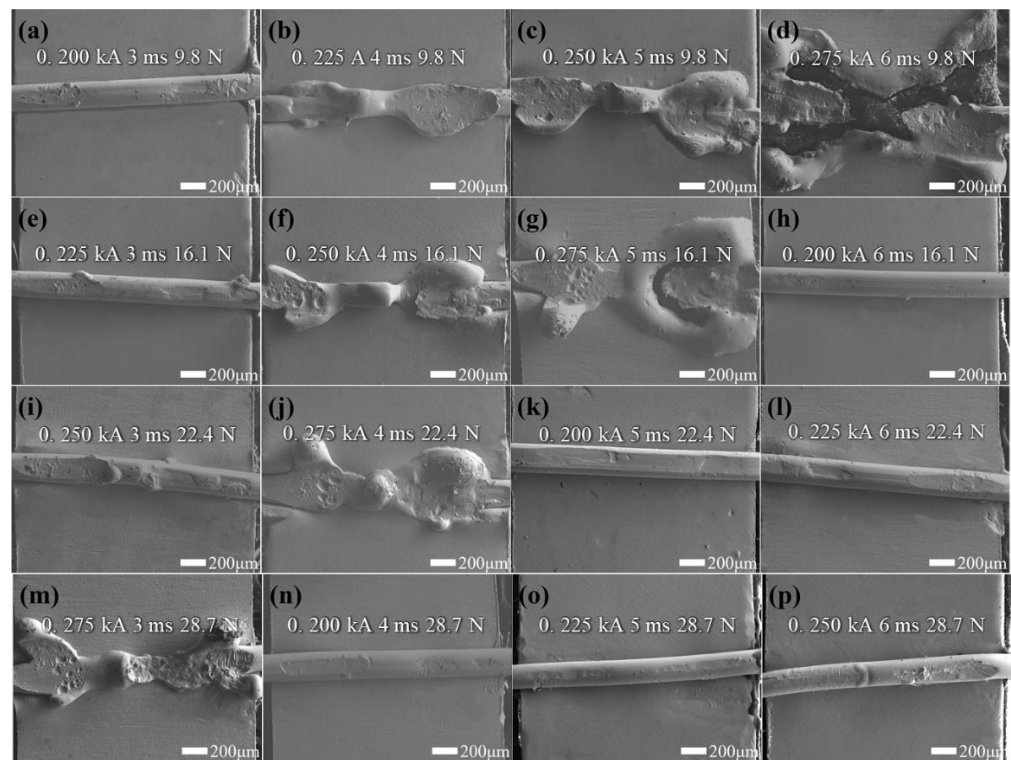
View of welded joints (a–p) based on the parameters a–p in Table 1.
